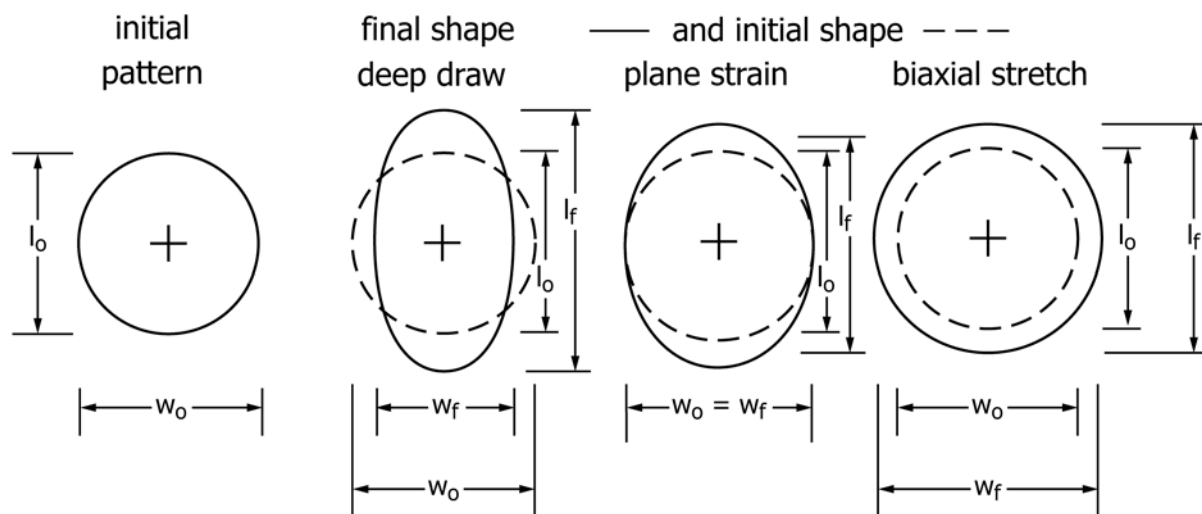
Possible Changes in Shape of the Grid Pattern Caused by Forming Operations on Metallic Sheet Products
